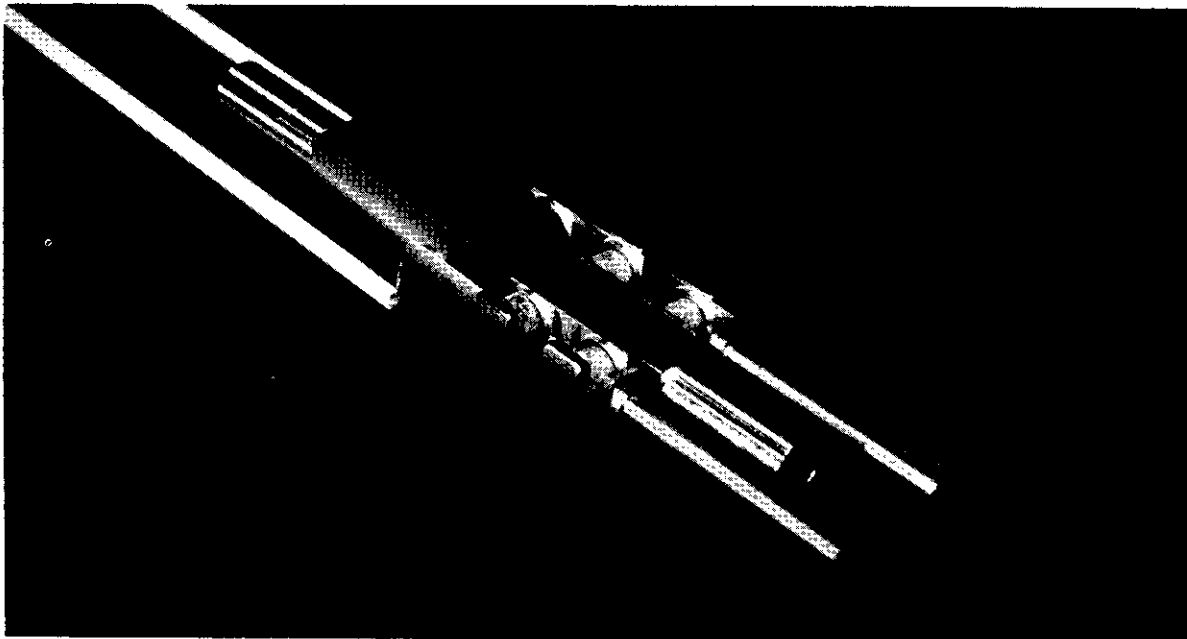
5-Ring Model Thermoelectric Generator — Partially Assembled.
